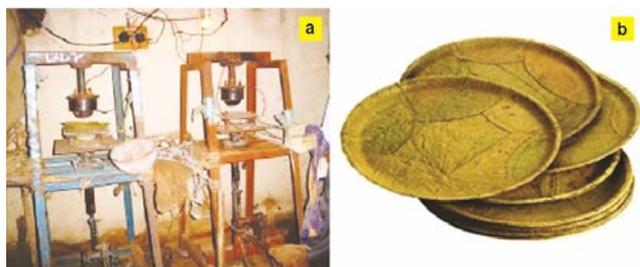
(a) *Sal* leaf plate making machine and (b) Machine pressed plates
